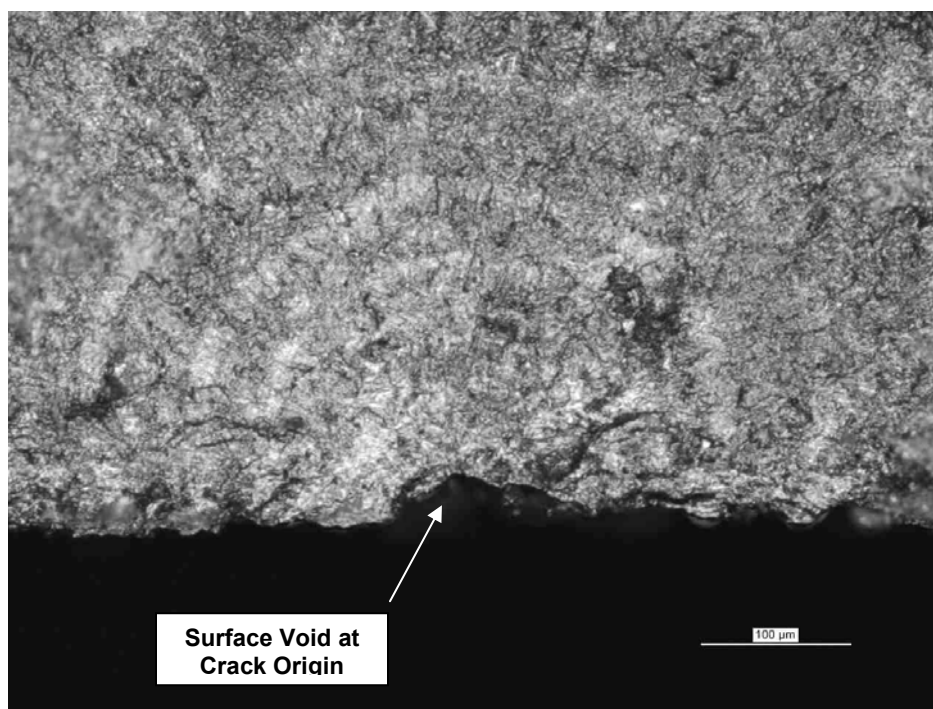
Critical Crack Origin on Specimen #29
